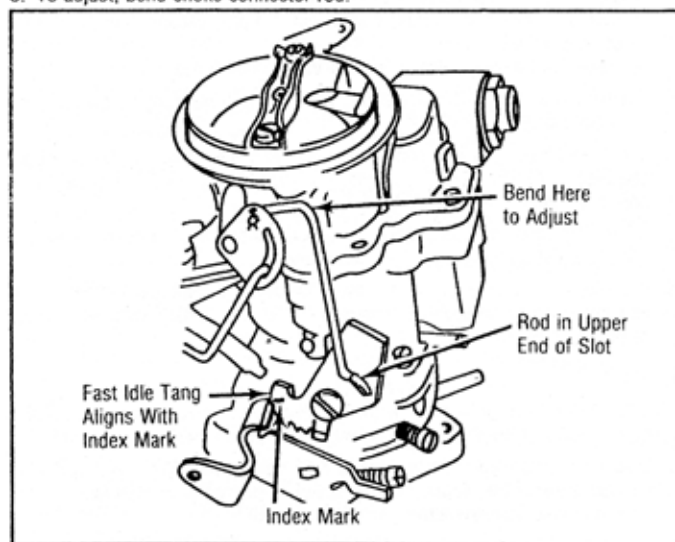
Fast Idle Linkage Adjustment (Type C - If Equipped)
